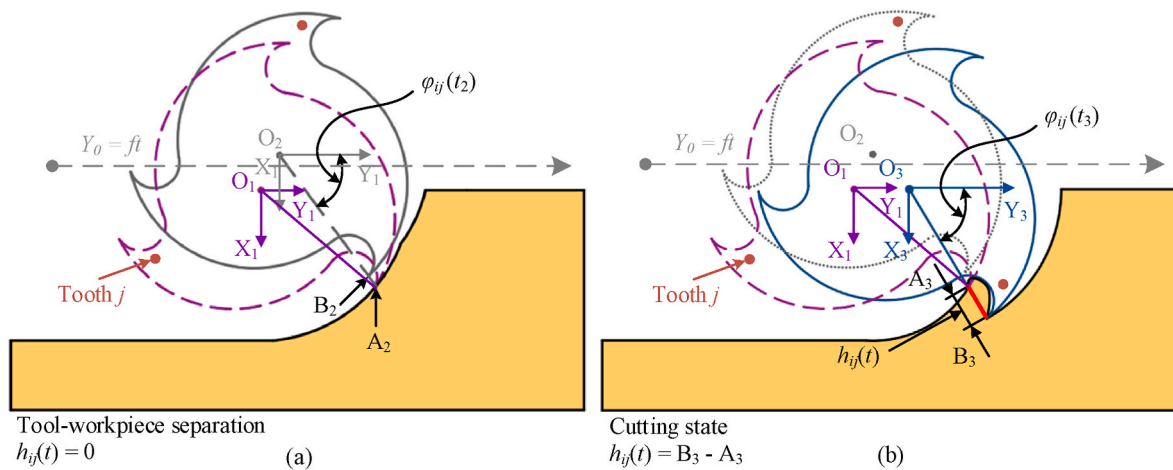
Instantaneous chip thickness calculation model considering SR. (a) Tool-workpiece separation, (b) Calculation method of dynamic chip thickness after tool-workpiece separation.
